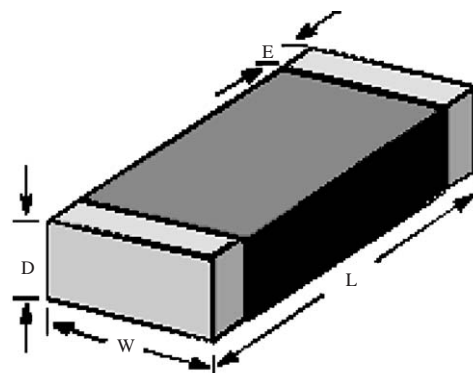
Label of mechanical dimensions of inductor SMD packages.
